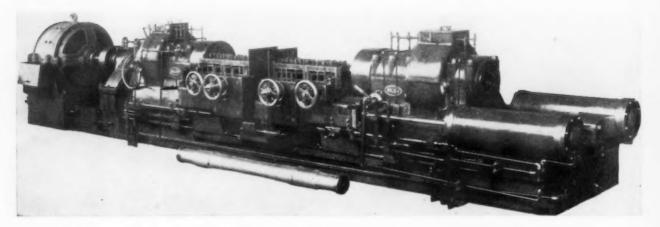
Powerful roughing lathe which rough turns the axle while it is chucked on the two collar surfaces.
